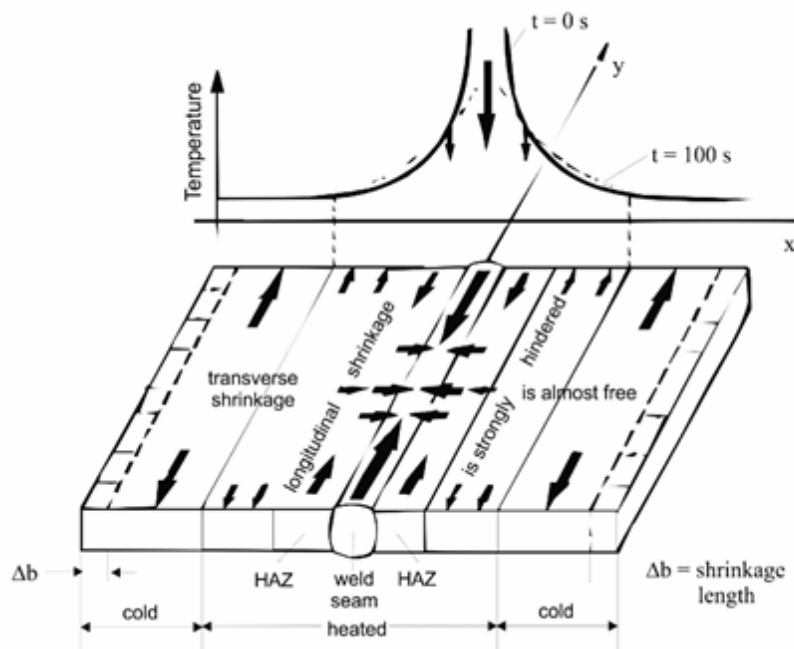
Shrinkage tendency and constraint conditions in a single pass weld (schematically) [4].
